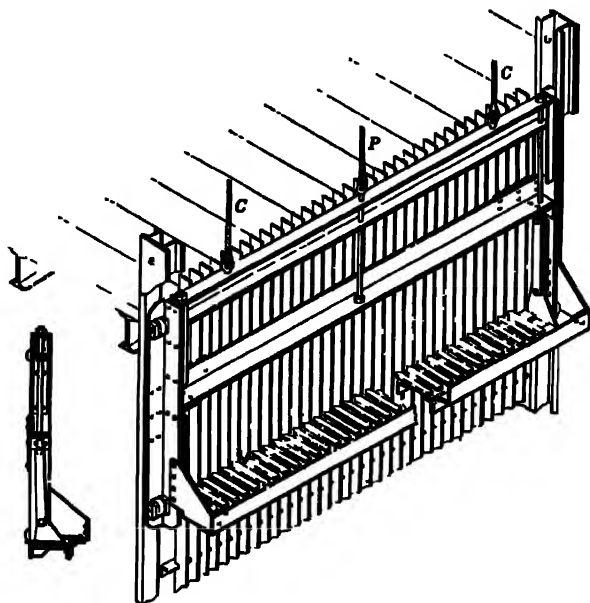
Mechanical rake (Newport News Shipbuilding and Dry Dock Co)
